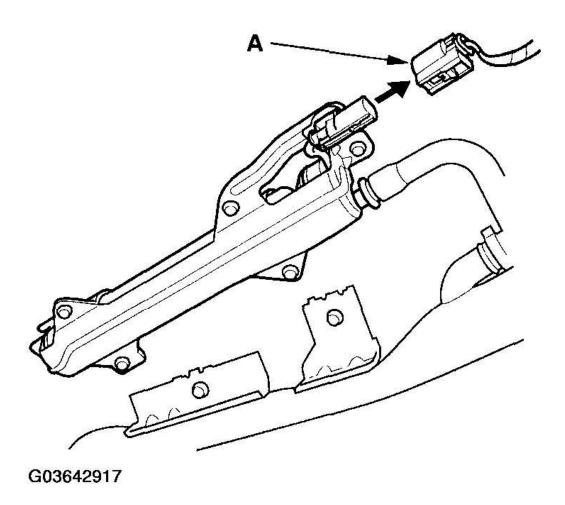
Disconnecting Roof Wire Harness 2P Connector From Side Curtain Airbag Courtesy of AMERICAN HONDA MOTOR CO., INC.
